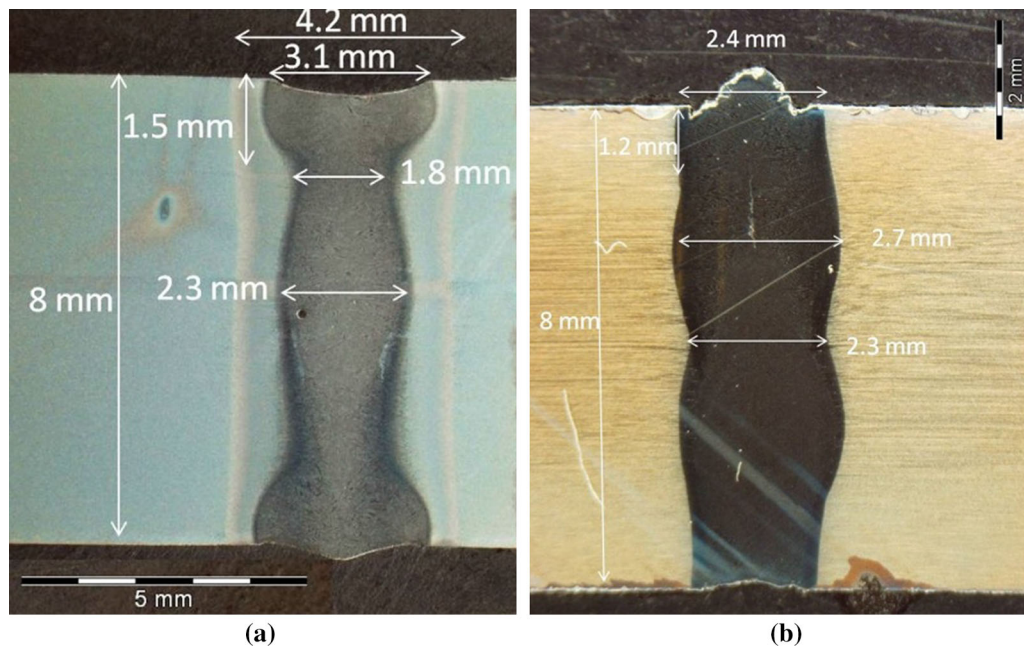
Experimental longitudinal cross section of laser welding of (a) martensitic stainless steel and (b) austenitic stainless steel (non dissimilar welding but welding of each steel with itself).
